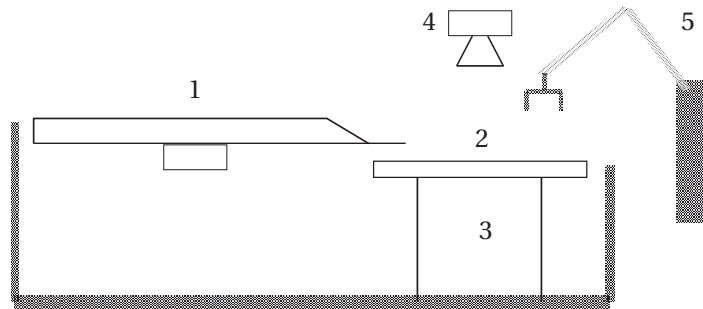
Flexible parts feeding system with tooling plate for part separation [51]
